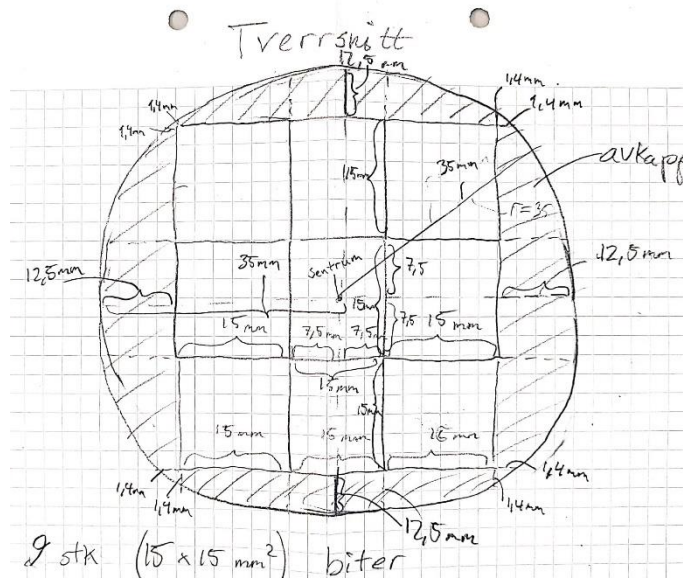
The drawing of the cross-section area used by the workshop at Sintef Manufacturing to cut the AA2196 extrusion into 15*15*150mm rods.
